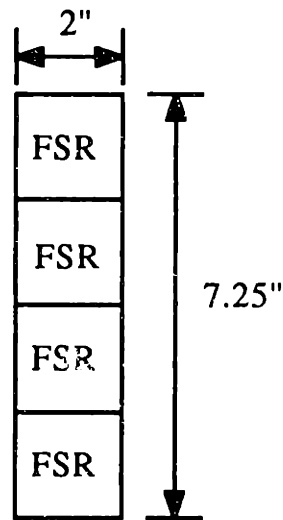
Side View of the Hole for the Peg-In-Hole Experiments with a Two Sided Hole
